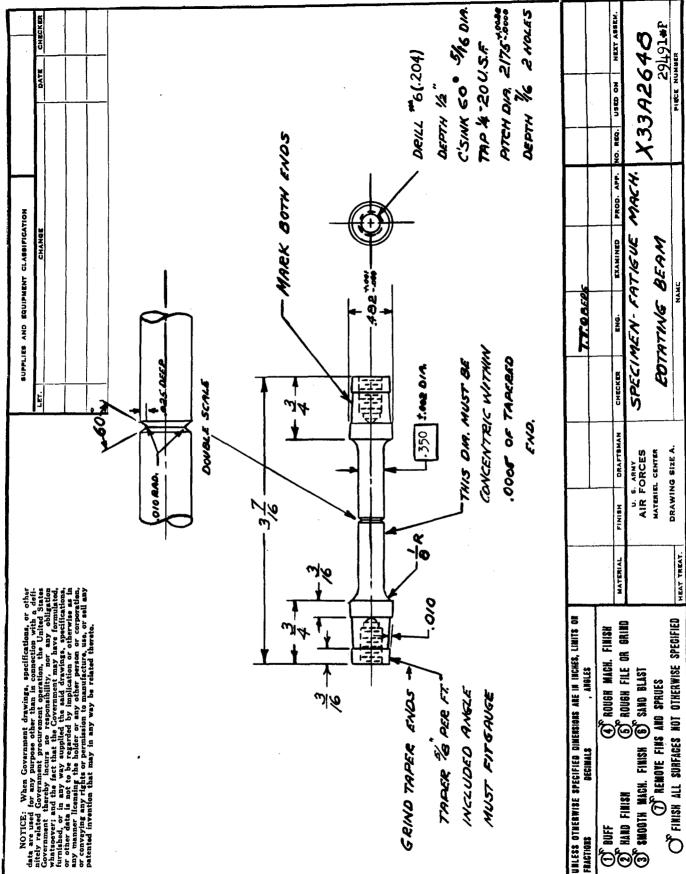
ROTATING BEAM FATIGUE SPECIMEN
